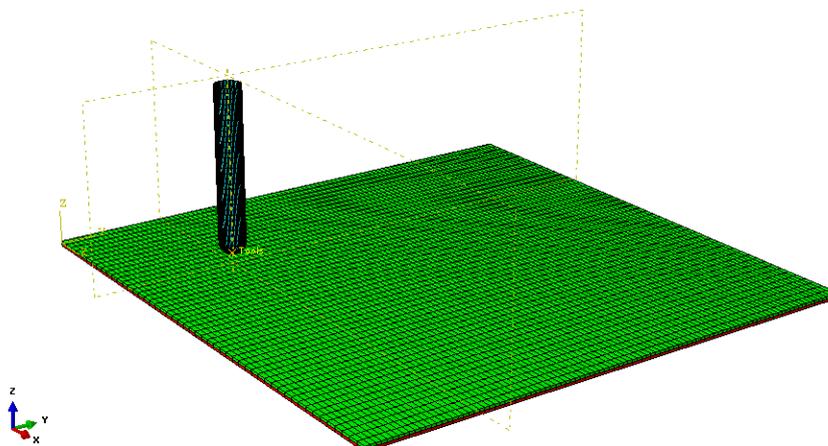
Assembly of the tool on the bilayer sheet in ABAQUS environment.
